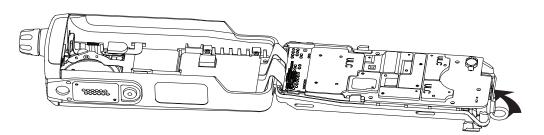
Assemble the Main O-Ring at Antenna Holder
